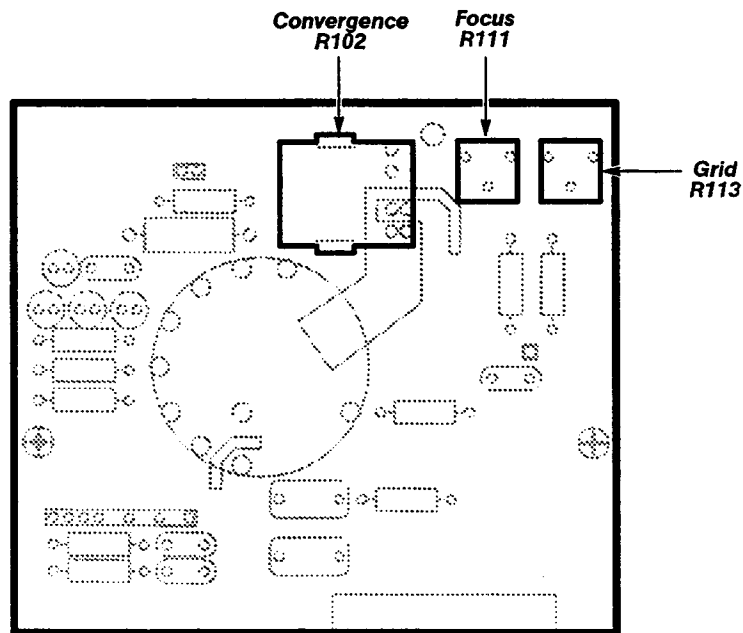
A27 CRT Socket Board Adjustment Locations
